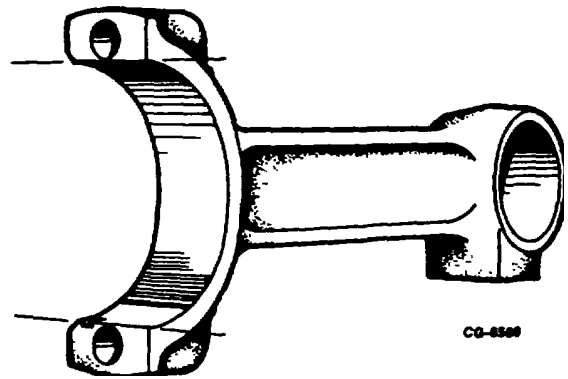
Connecting Rod Bearing Bore Taper Measurement
